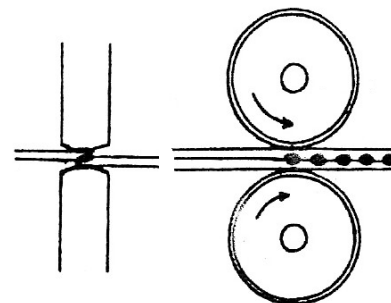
Schematic of a mash seam welding process whereby the electrodes drive the work-pieces and sequential weld nuggets are formed.
